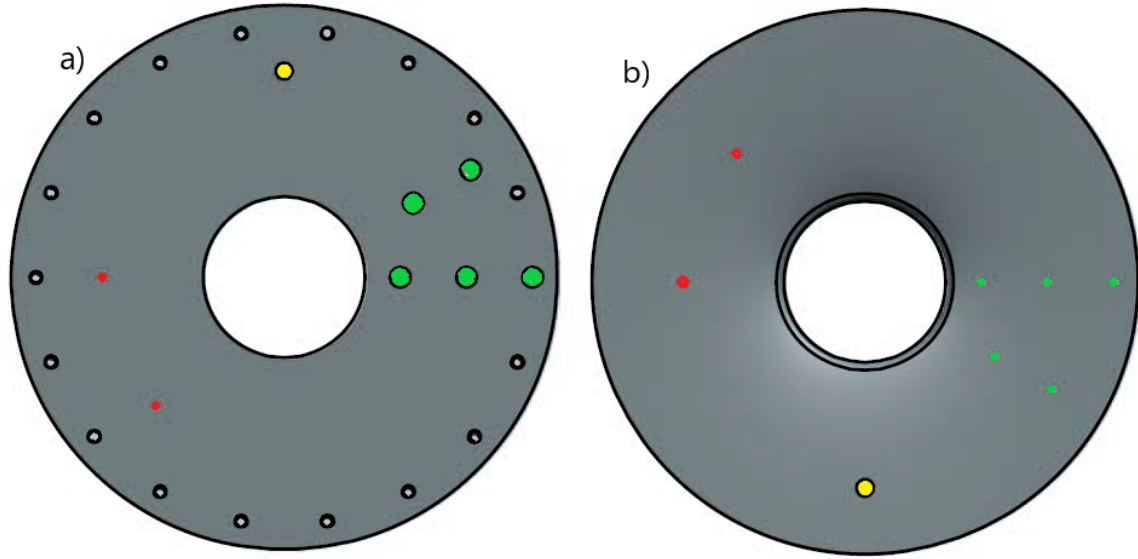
Radial RDE Channel Plate. a) Top View and b) Bottom View.
